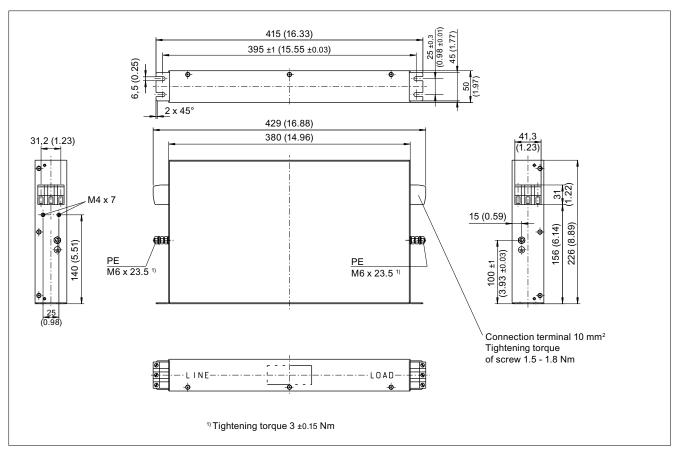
Dimension drawing of Basic Line Filter for Basic Line Modules 20 kW, order number 6SL3000-0BE21-6DAx, all dimensions in mm and (inches)
